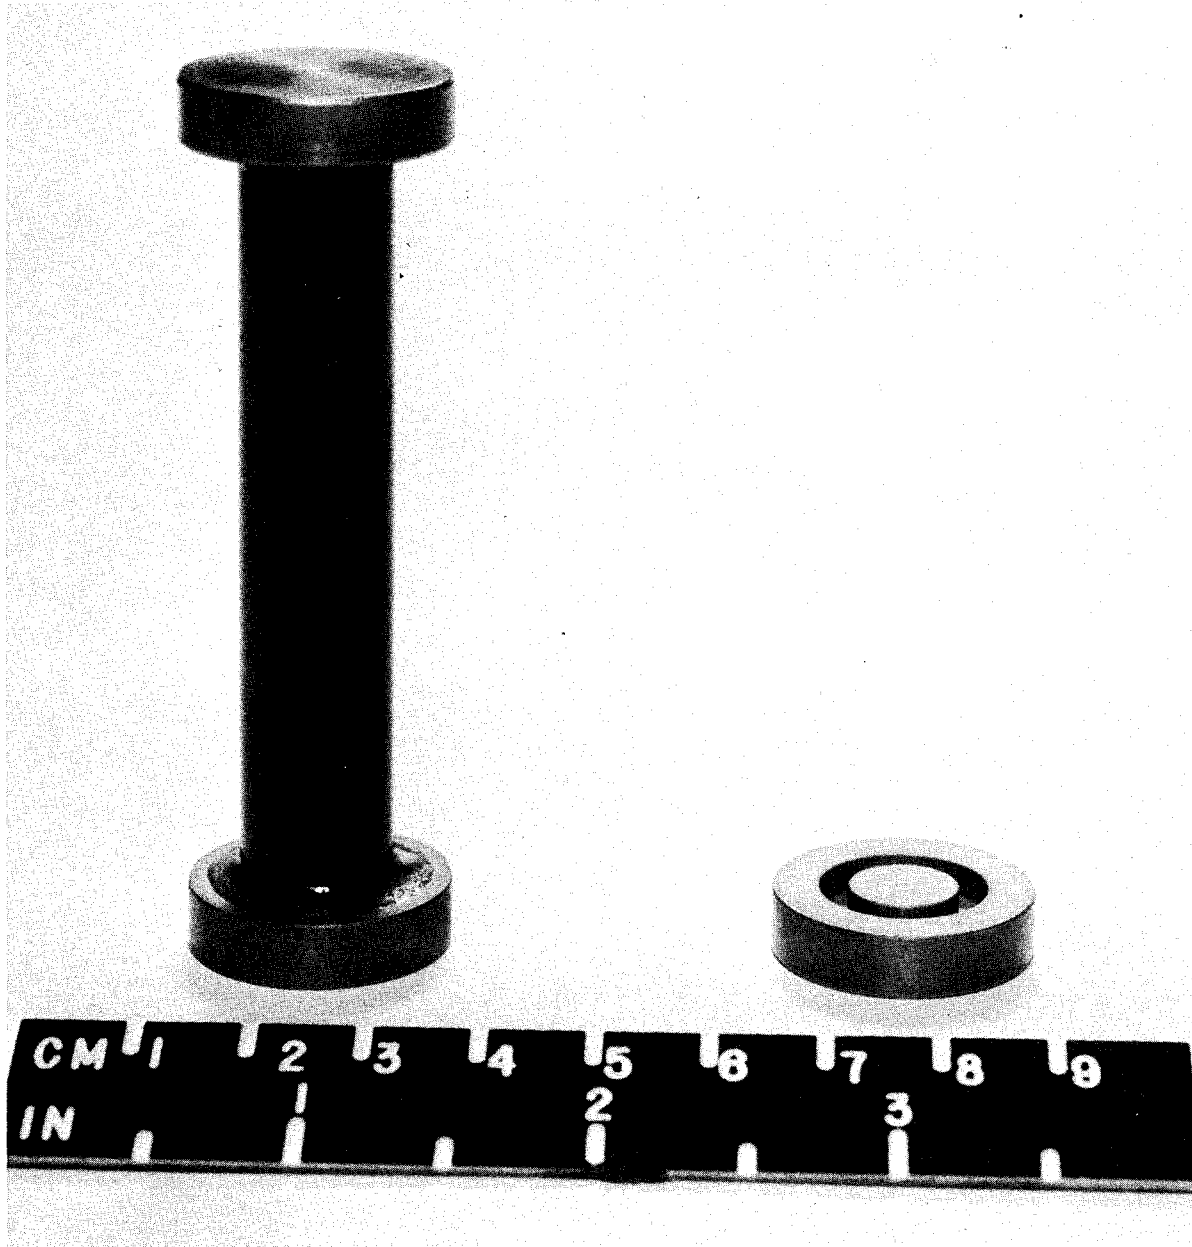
Stainless-steel end plugs and specimen assembled for axial-compression test.
